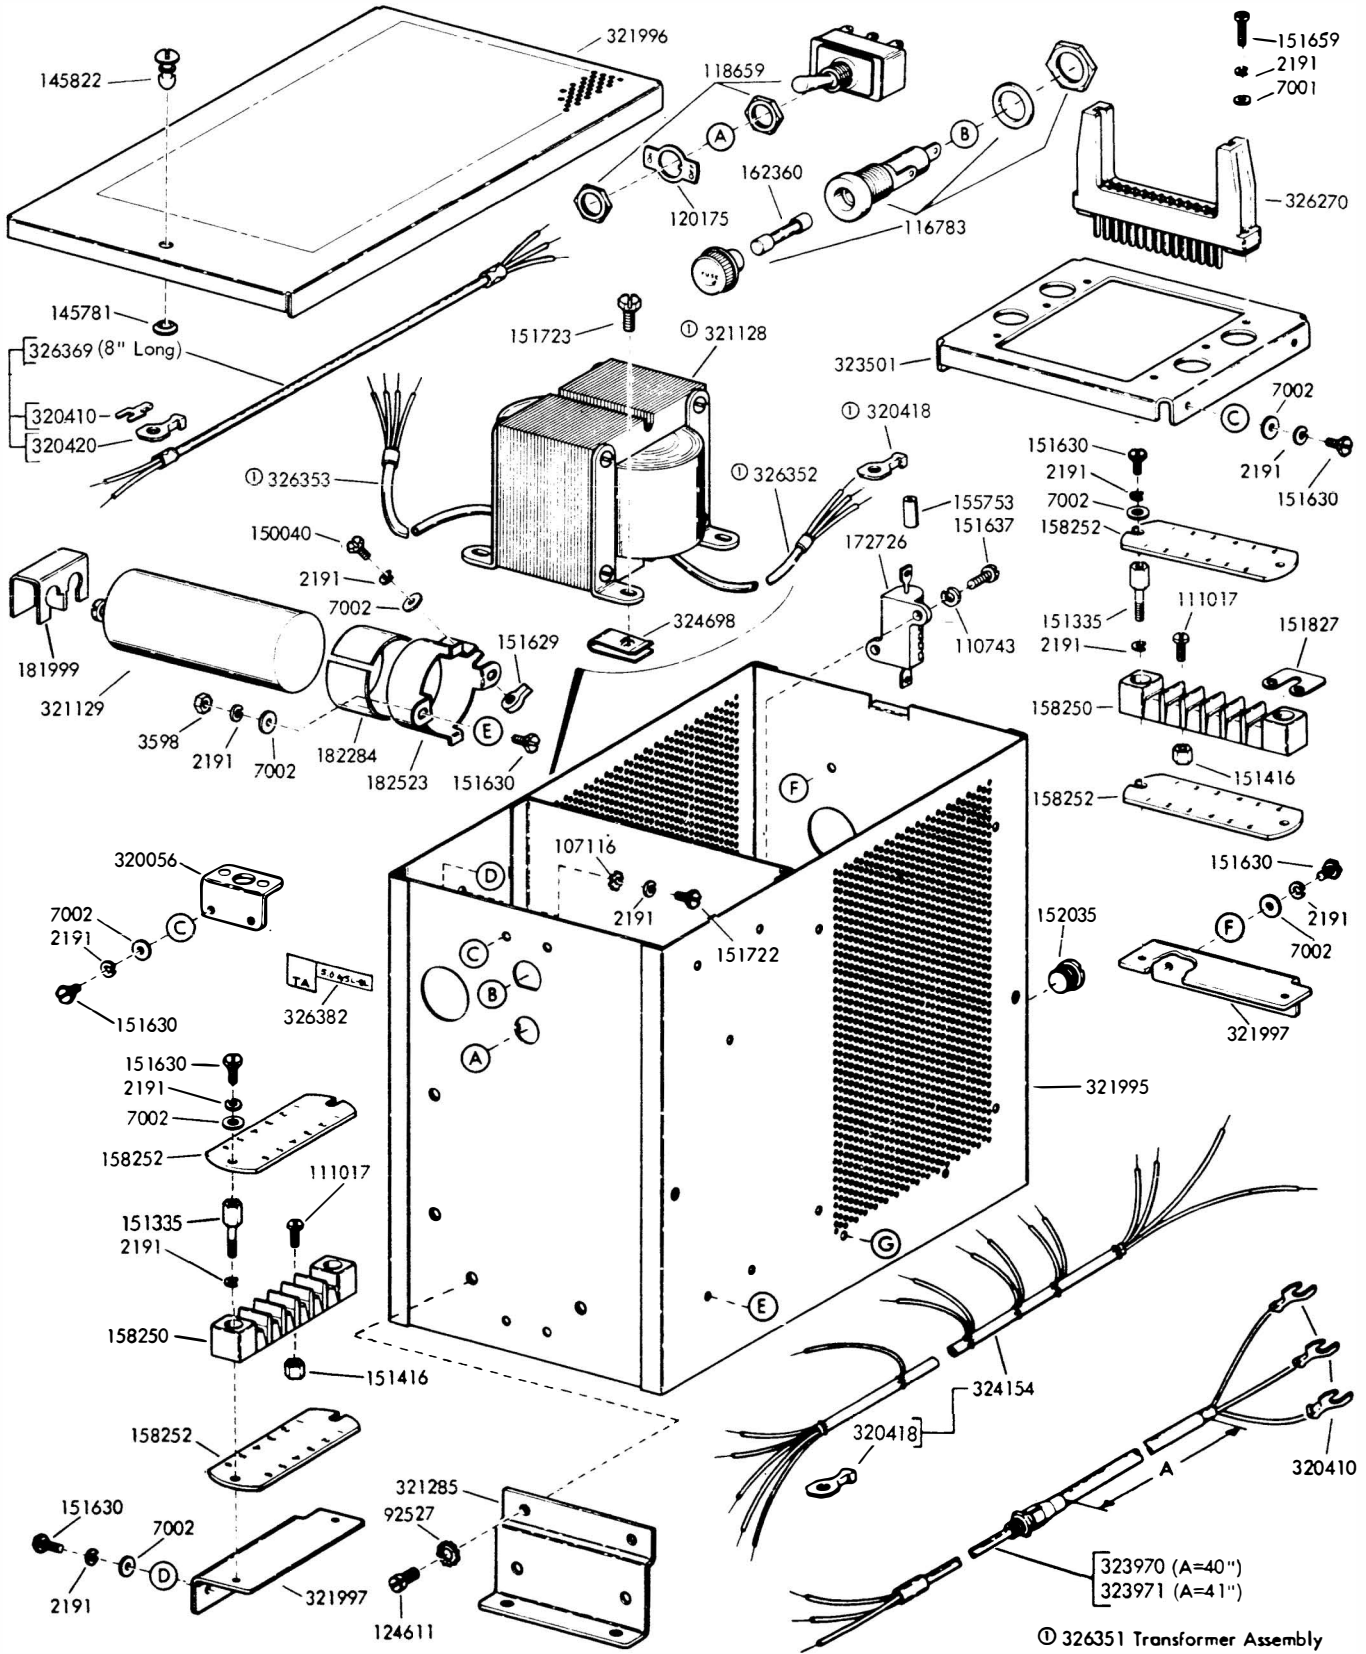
326792 ELECTRICAL SERVICE ASSEMBLY - Used w/Mini-TD Set
